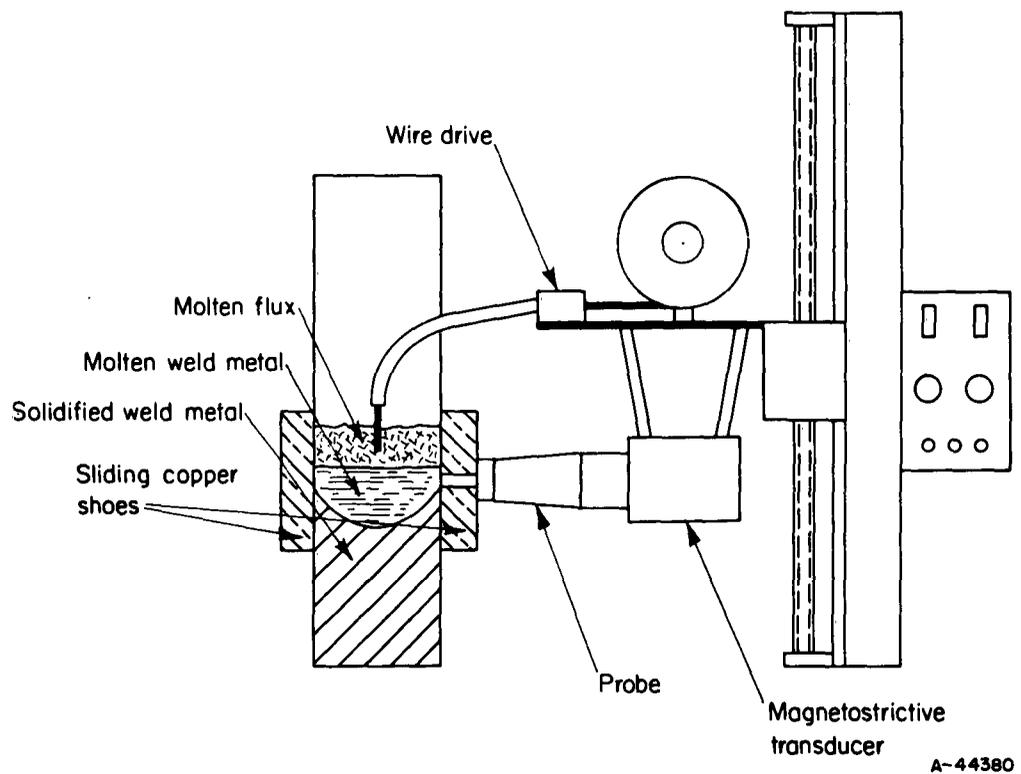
SETUP FOR ELECTROSLAG WELDING USING
